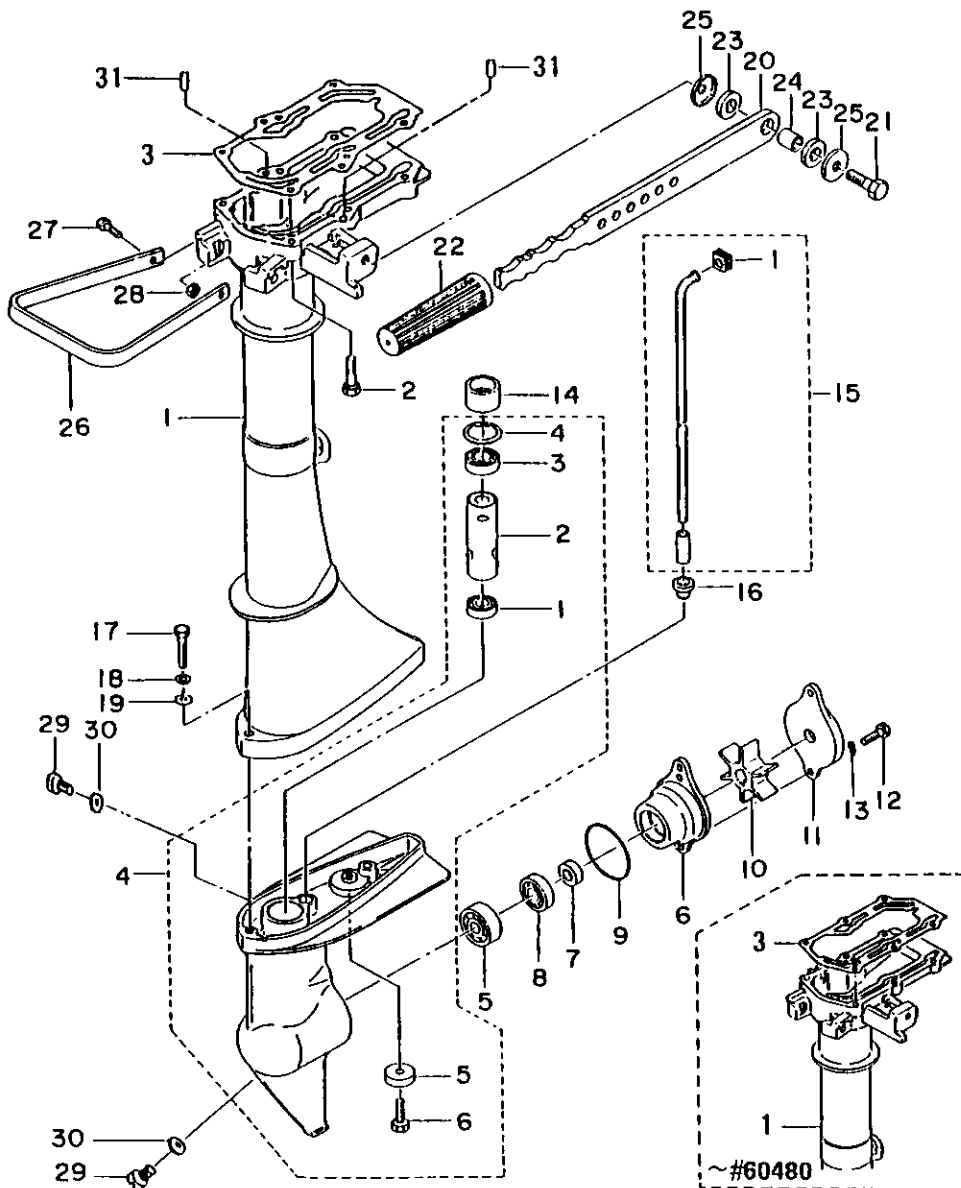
DRIVE SHAFT HOUSING, GEAR CASE & STEERING HAND
